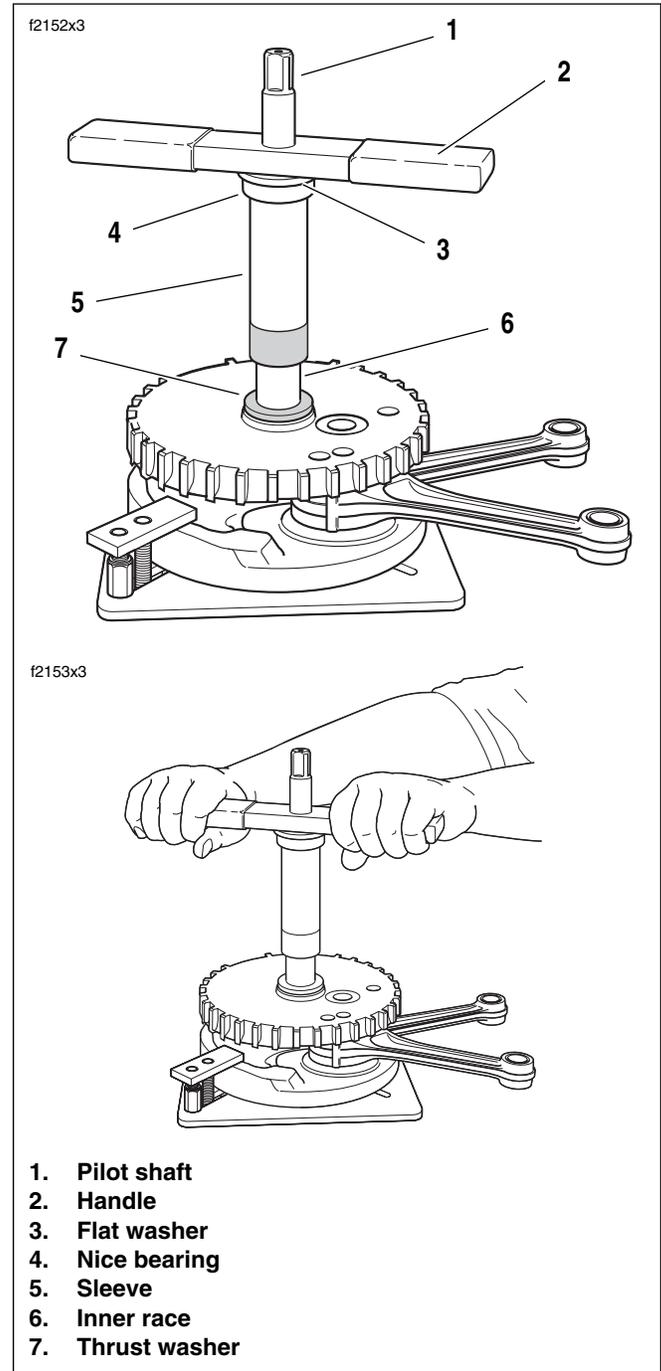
Press Inner Race Onto Sprocket Shaft
